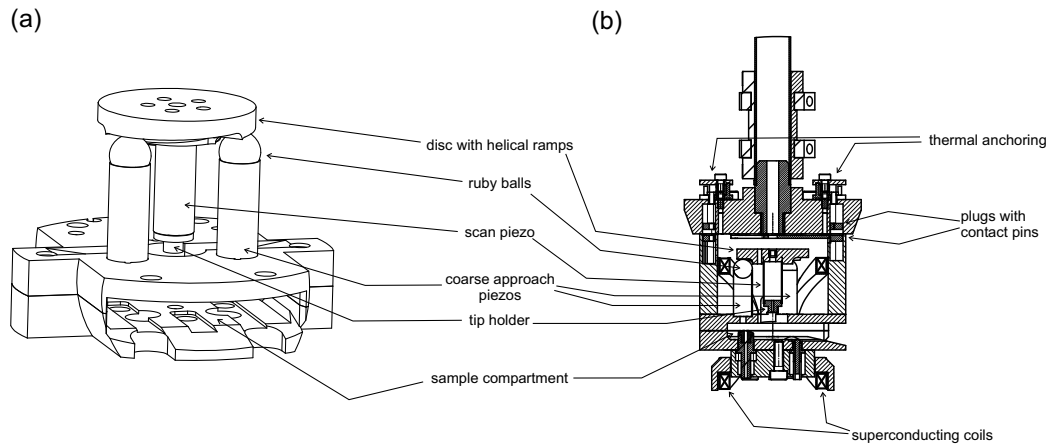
(a) Principle of a Besocke STM, (b) cut through the STM head.
